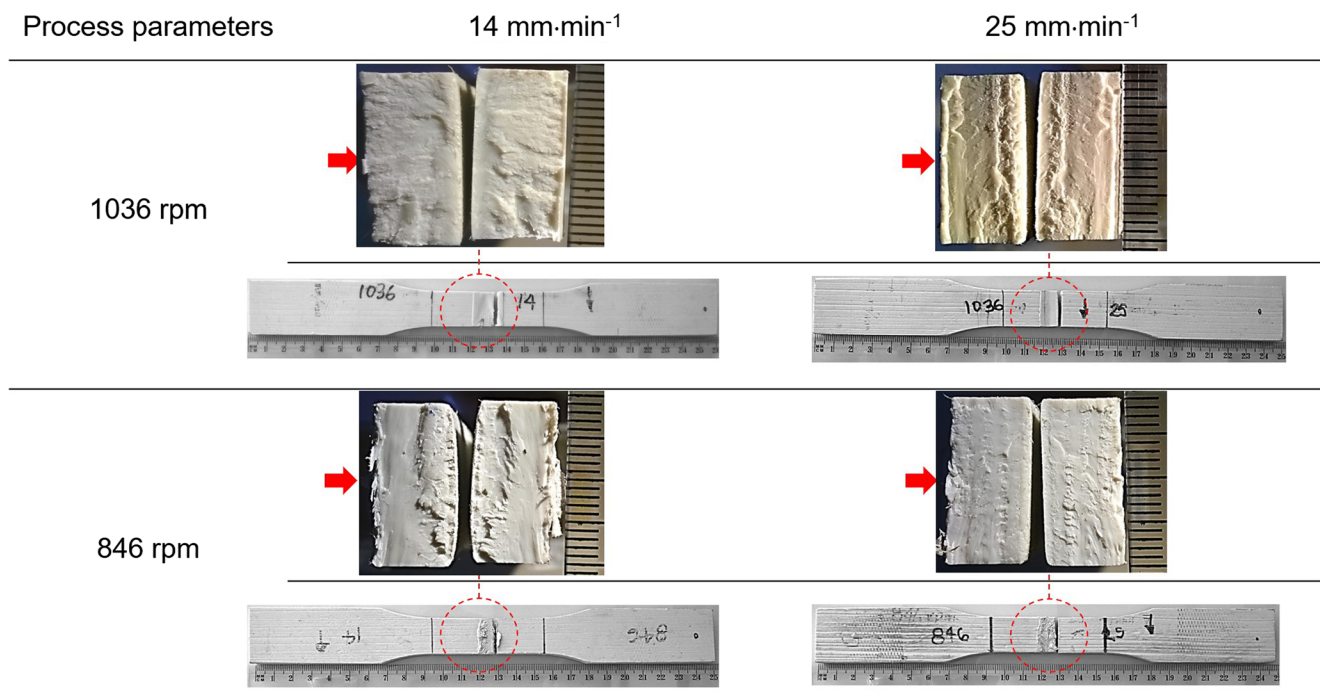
Fracture surface appearance. Red arrows show retreating side of welded joints
